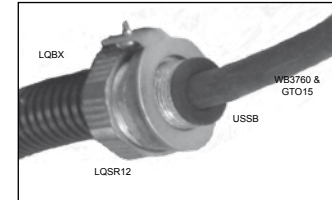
Slide the central part of the LQSR12 connector over the assembly and screw the large head onto it.
